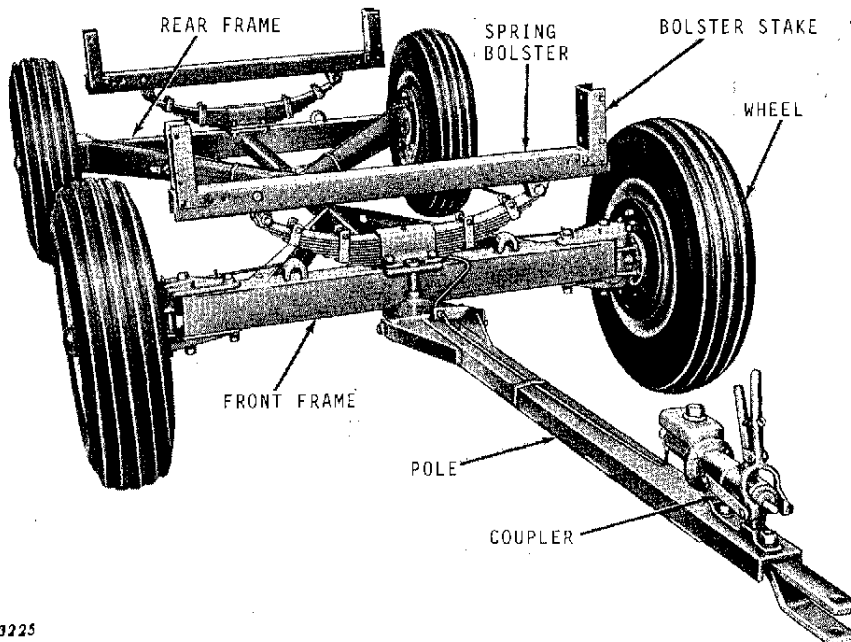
John Deere No. 963 Wagon with Four-Wheel Hydraulic Brakes and Spring Bolsters
